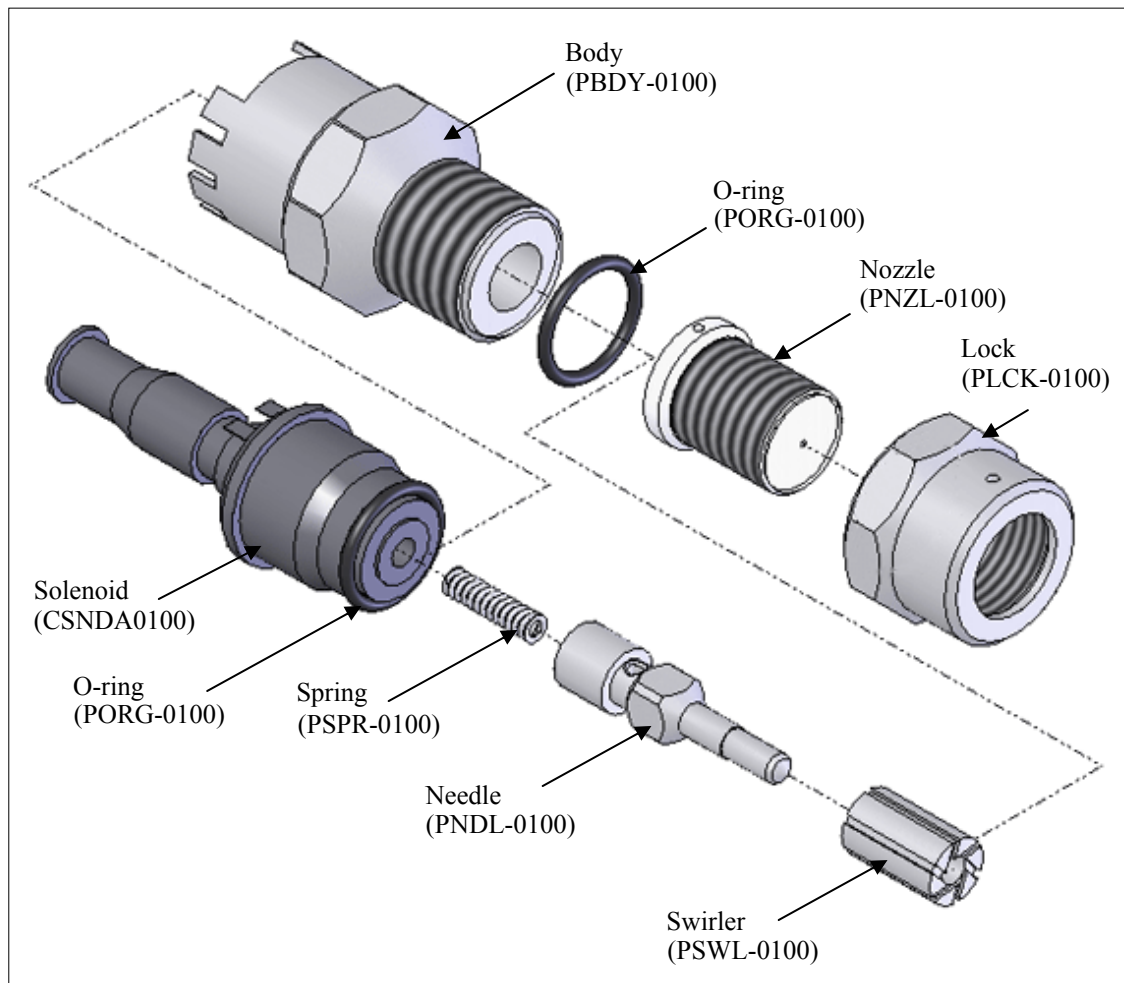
Exploded isometric view of prototype injector mark O (CINJ-0100)
